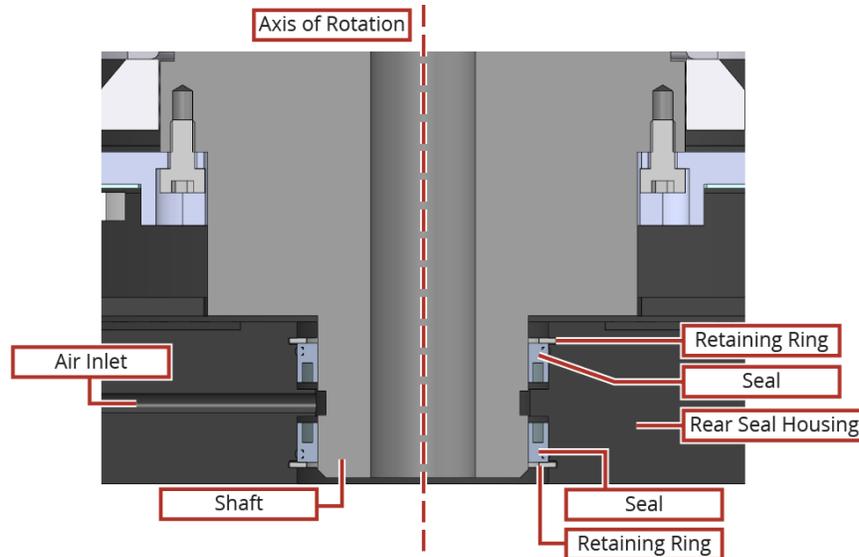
Cross-section View of Rear Seal Showing Seal Orientations
